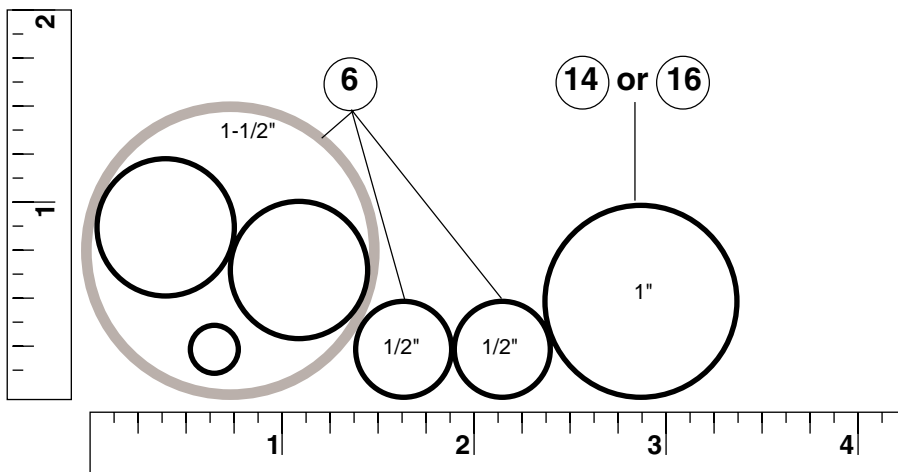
Cables / Hoses in Machine Cable/Hose Carrier - THC-1/DCC Inductive IHS w/Options
